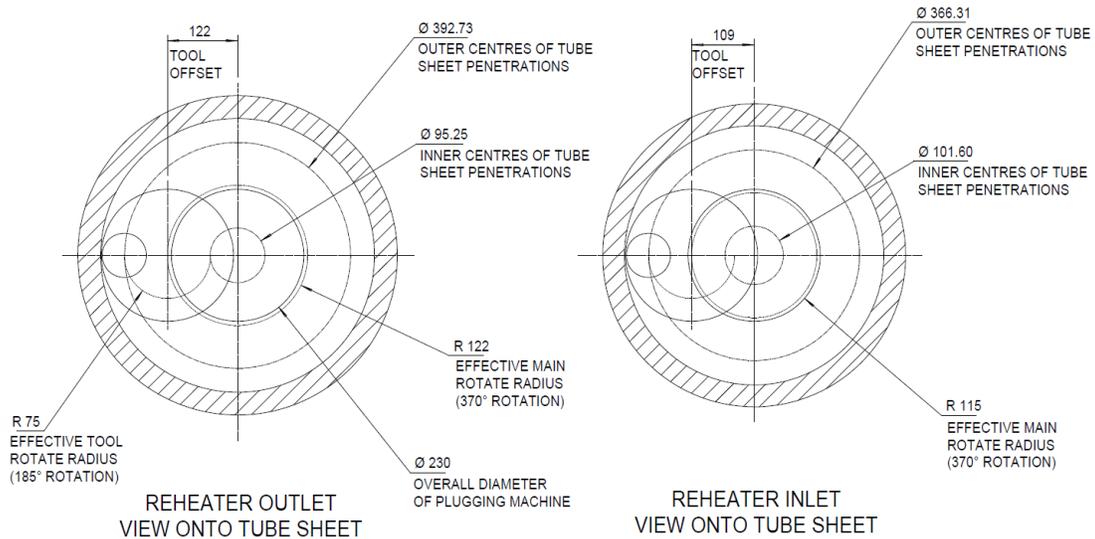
Motion of RTS Tool Body to manipulate tool on different tube sheets
